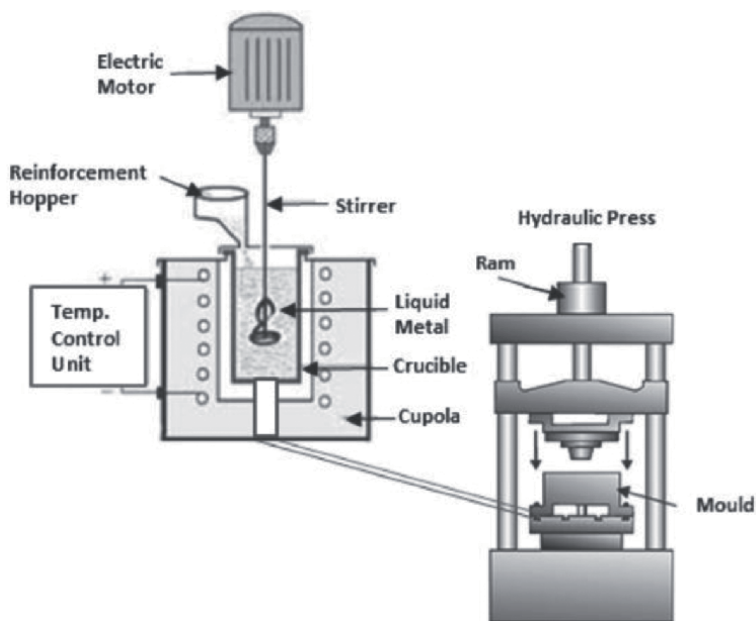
Bottom type stir casting set up with squeeze casting attachment [15].
